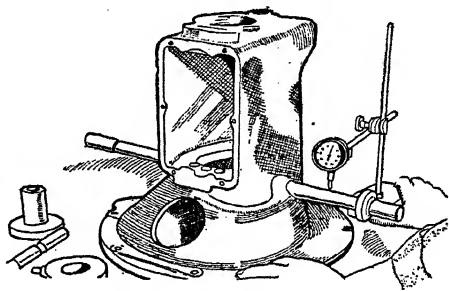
A dial gauge being used to check automobile gearbox castings with the aid of a bar gauge.
